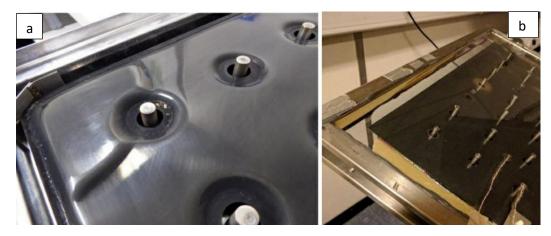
(a) Tray collector before attaching the cover glass, using a stainless steel tray enables the pins to be spot welded in place, (b)
